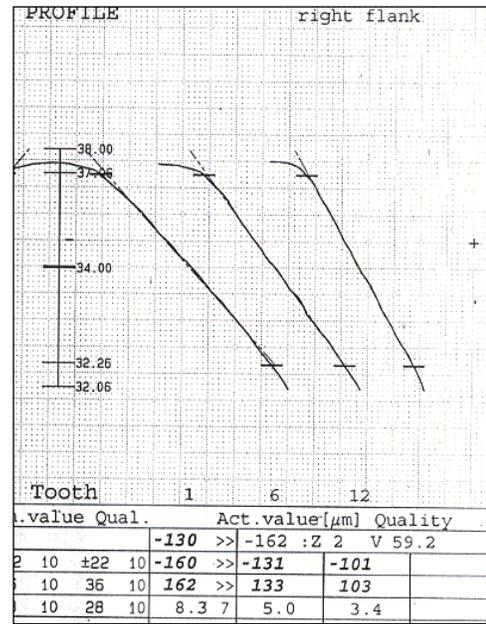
Involute profile deviations in reinforced Nylon 6/6 gear-right flank
